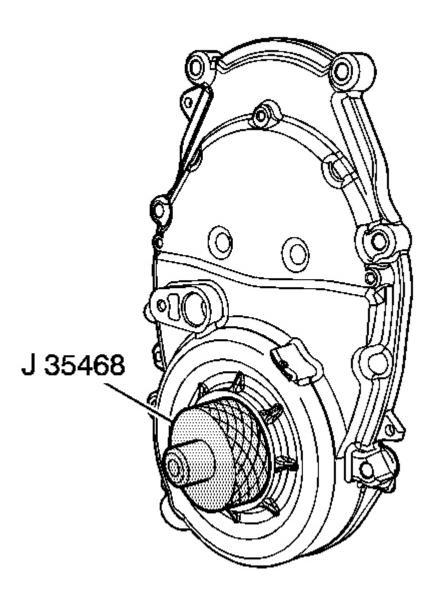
Installing Front Seal Courtesy of GENERAL MOTORS CORP.
